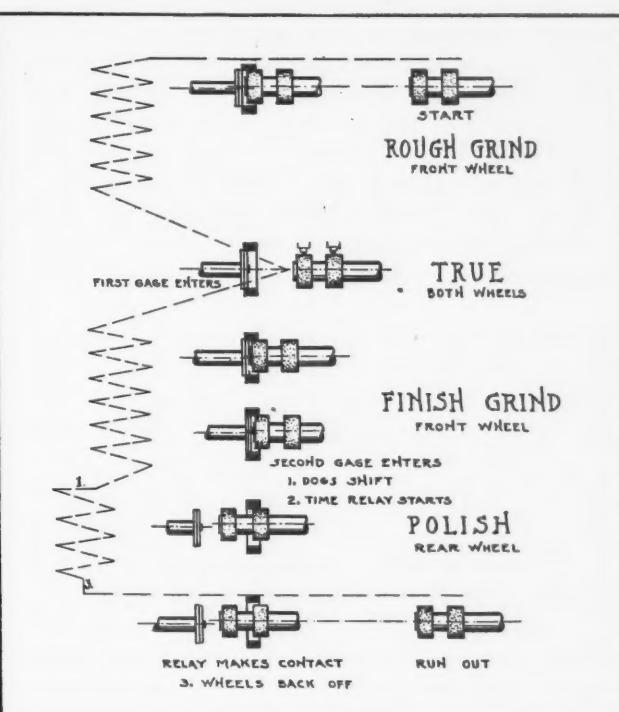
Sequence of Automatic Operations in Rough- and Finish-grinding a Hole with One Wheel and Polishing with a Second Wheel on the Same Spindle
